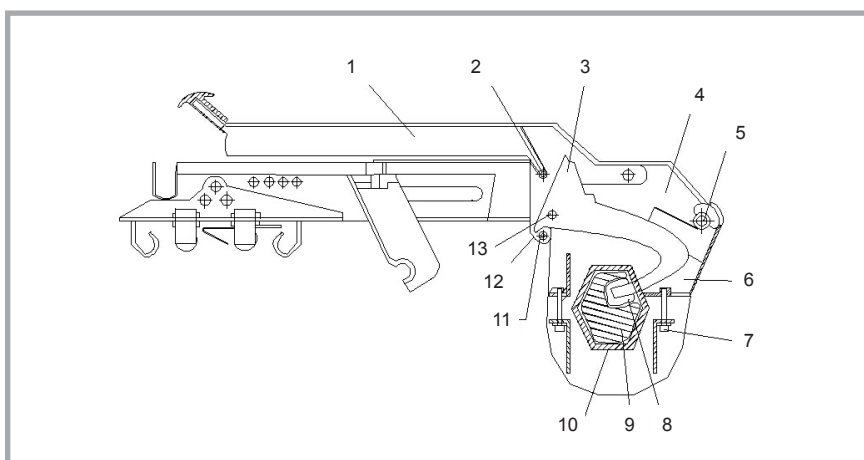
Structure of SDDA2122PH-type cradle; 1) handle, 2) handle shaft, 3) transfer lever; 4) cradle body; 5) stent axis; 6) screw; 7) pressure plate; 8) gasbag; 9) locking set; 10) hexagon gripping pipe; 11) locking axis; 12) locking set; 13) lever axis.
